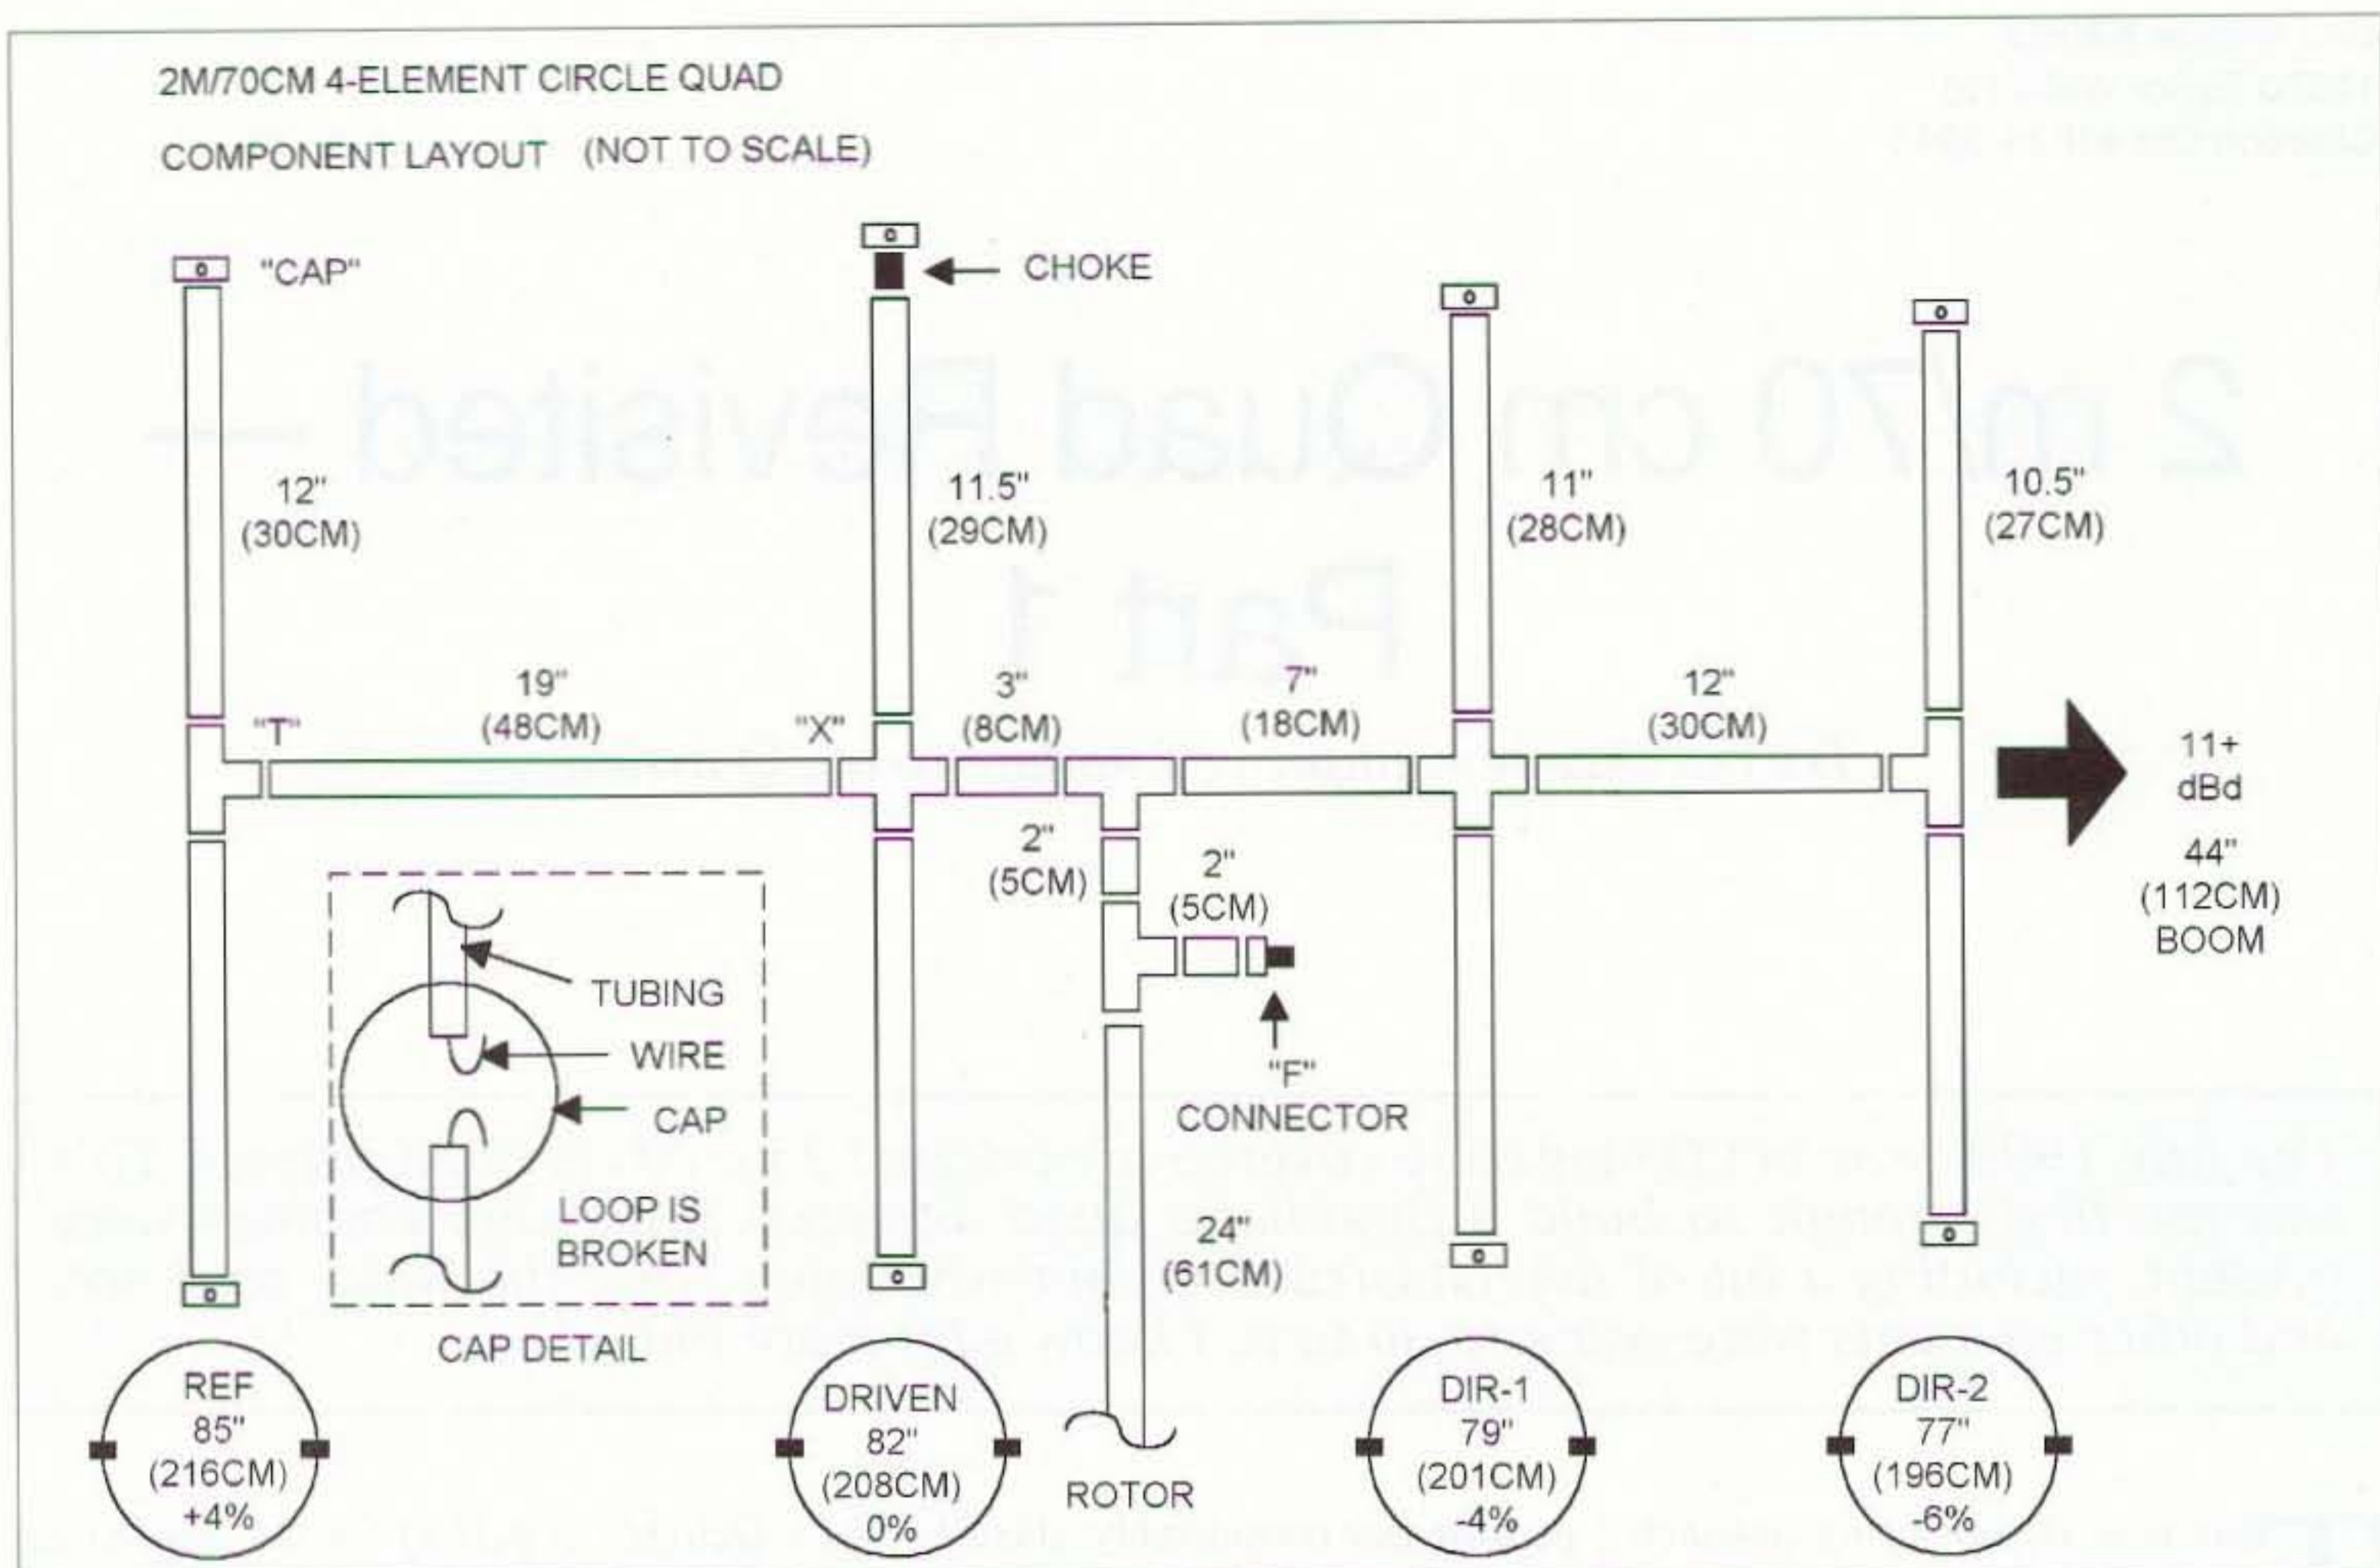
Component layout for the 2 m/70 cm 4-element circle quad.
